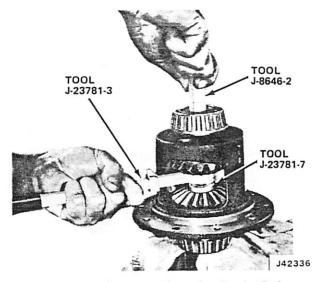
F-73 Threading Forcing Screw into Rotating Tool
